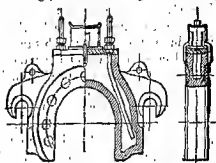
Horseshoe Bearing Ring for Marine Thrust Bearing.
